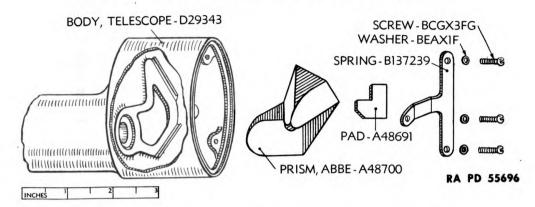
Abbe Prisms and Seat Assembly—Exploded View
